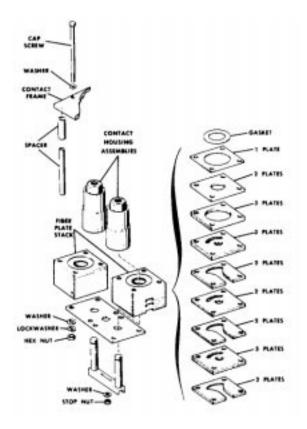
Components of arc interrupter assembly. reclosers above serial no 1000
